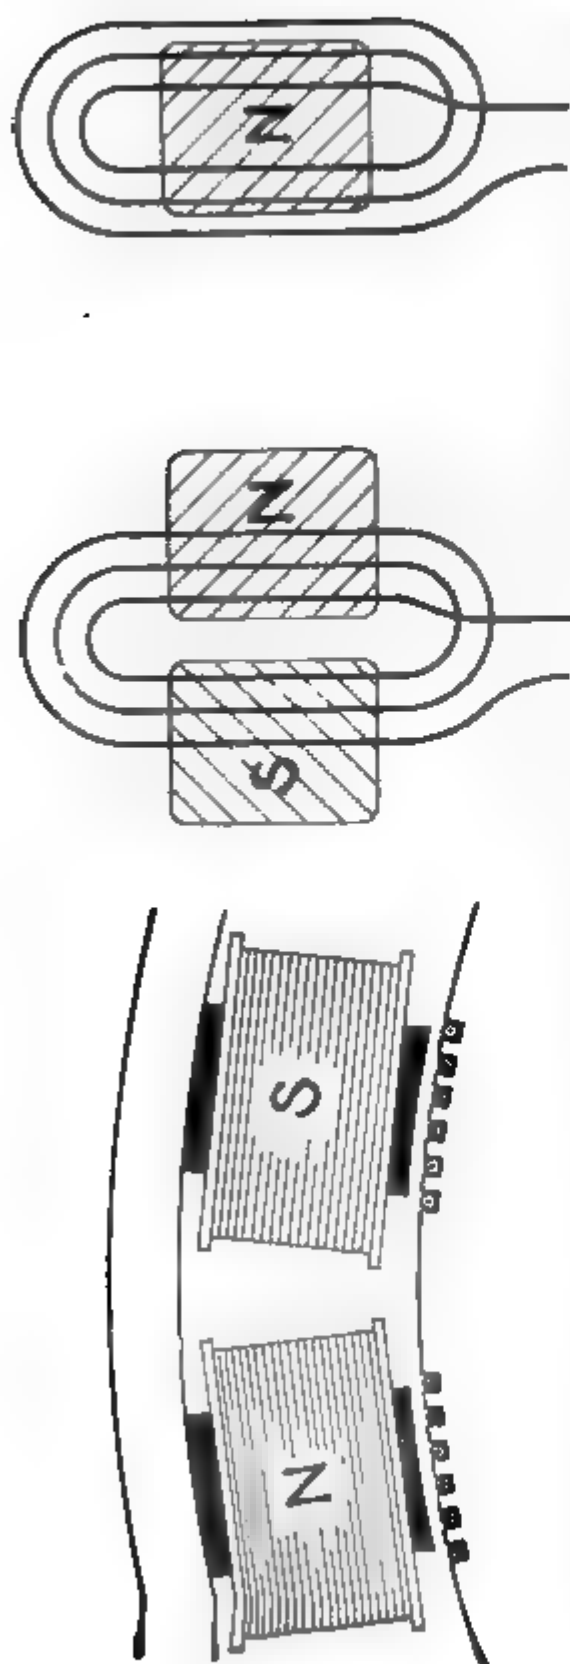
Allis-Chalmers armature construction; view showing section of frame and two layer winding.
